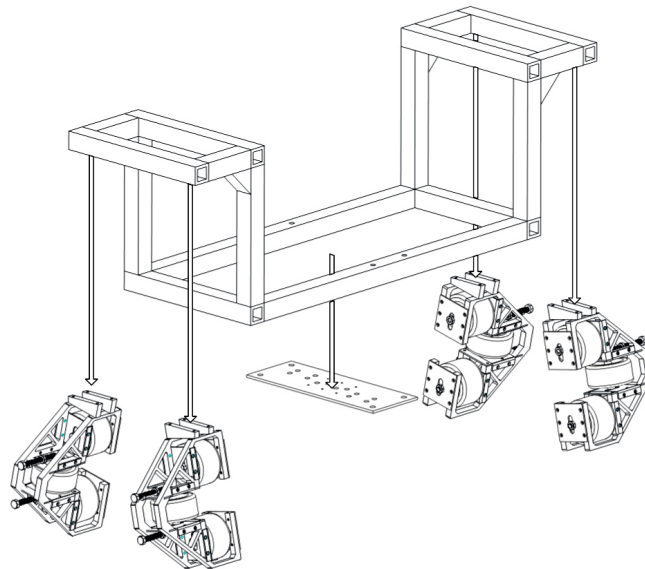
CAD model showing the cart chassis, wheel holders and mounting plate. Made with Solid Edge 2020 and Affinity Designer.
